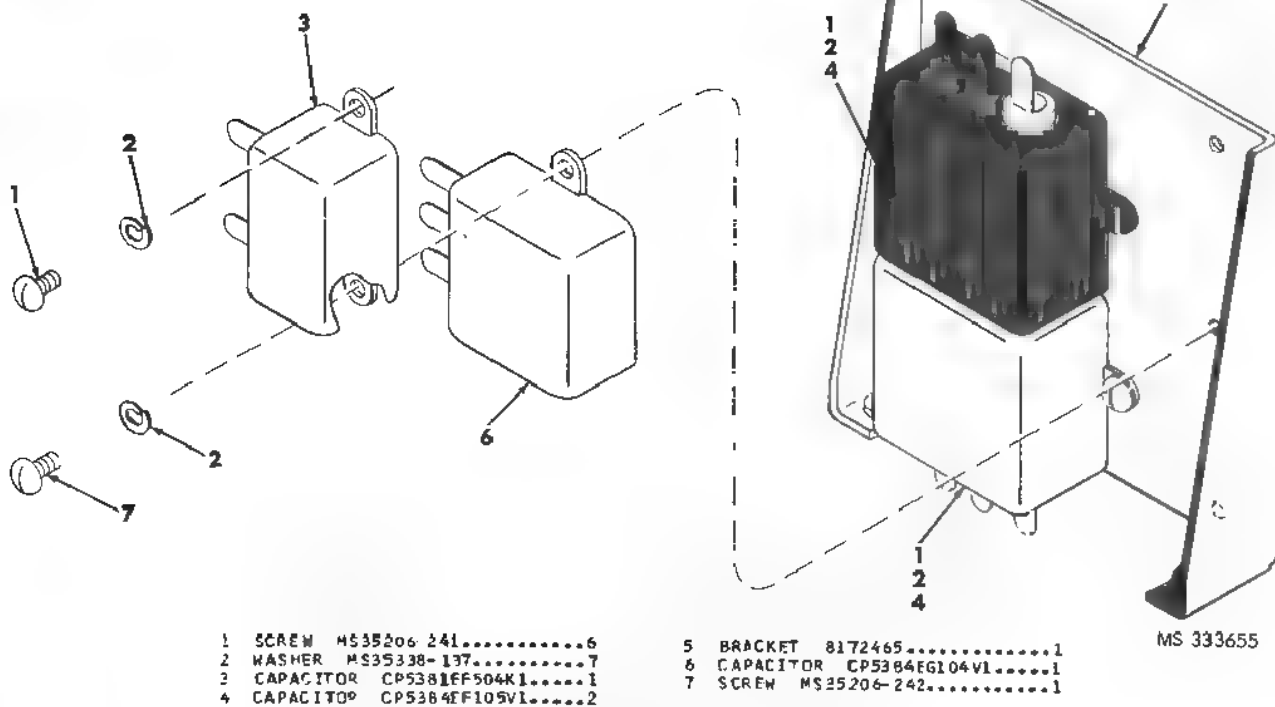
CAPACITOR ASSEMBLY /8172464/-EXPLODED VIEW
